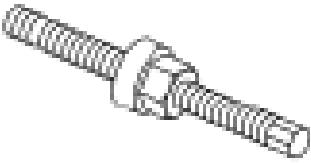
Locating Crankshaft Pulley Washer And Bolt
